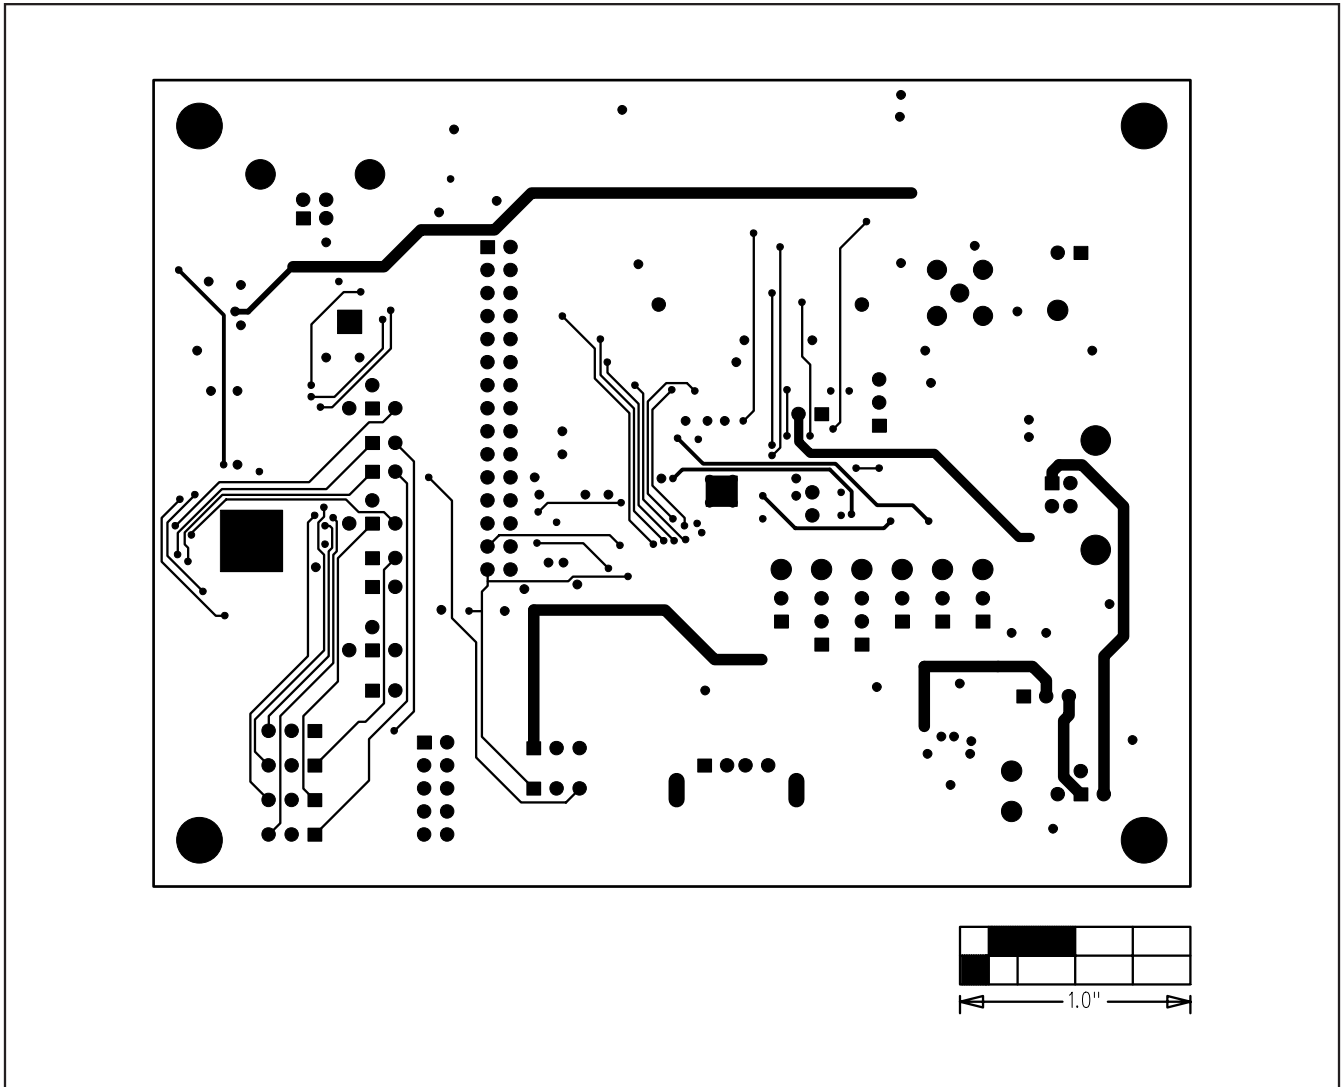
MAX14502 EV Kit PCB Layout—Solder Side
